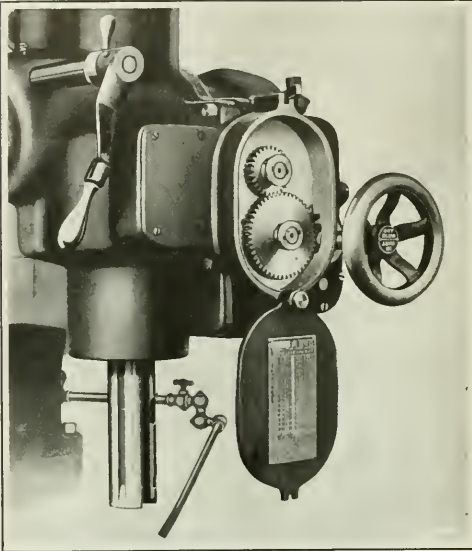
Close-up View of Feed-change Box on Front of Spindle Head
